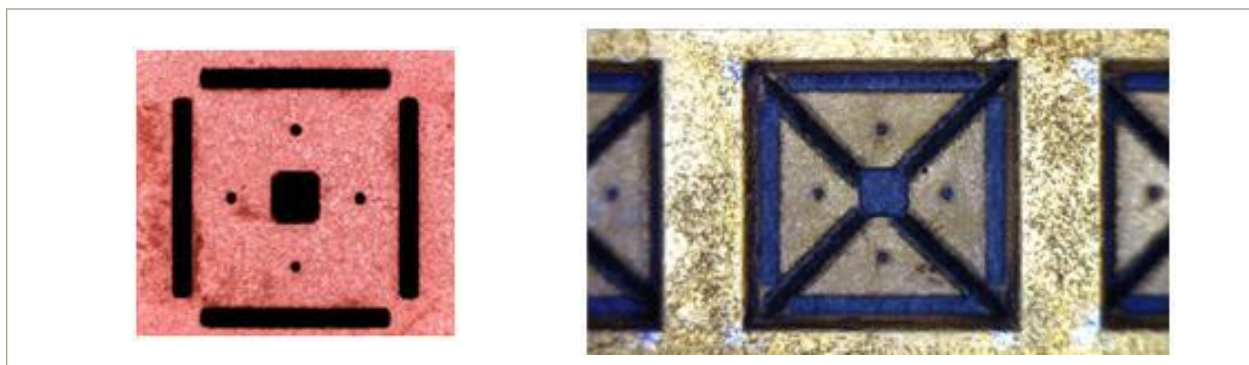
Right: injection molded, copper plated Gen 1.0 droopy bowtie radiator Left: Gen 1.0 droopy bowtie radiator after laser etch
